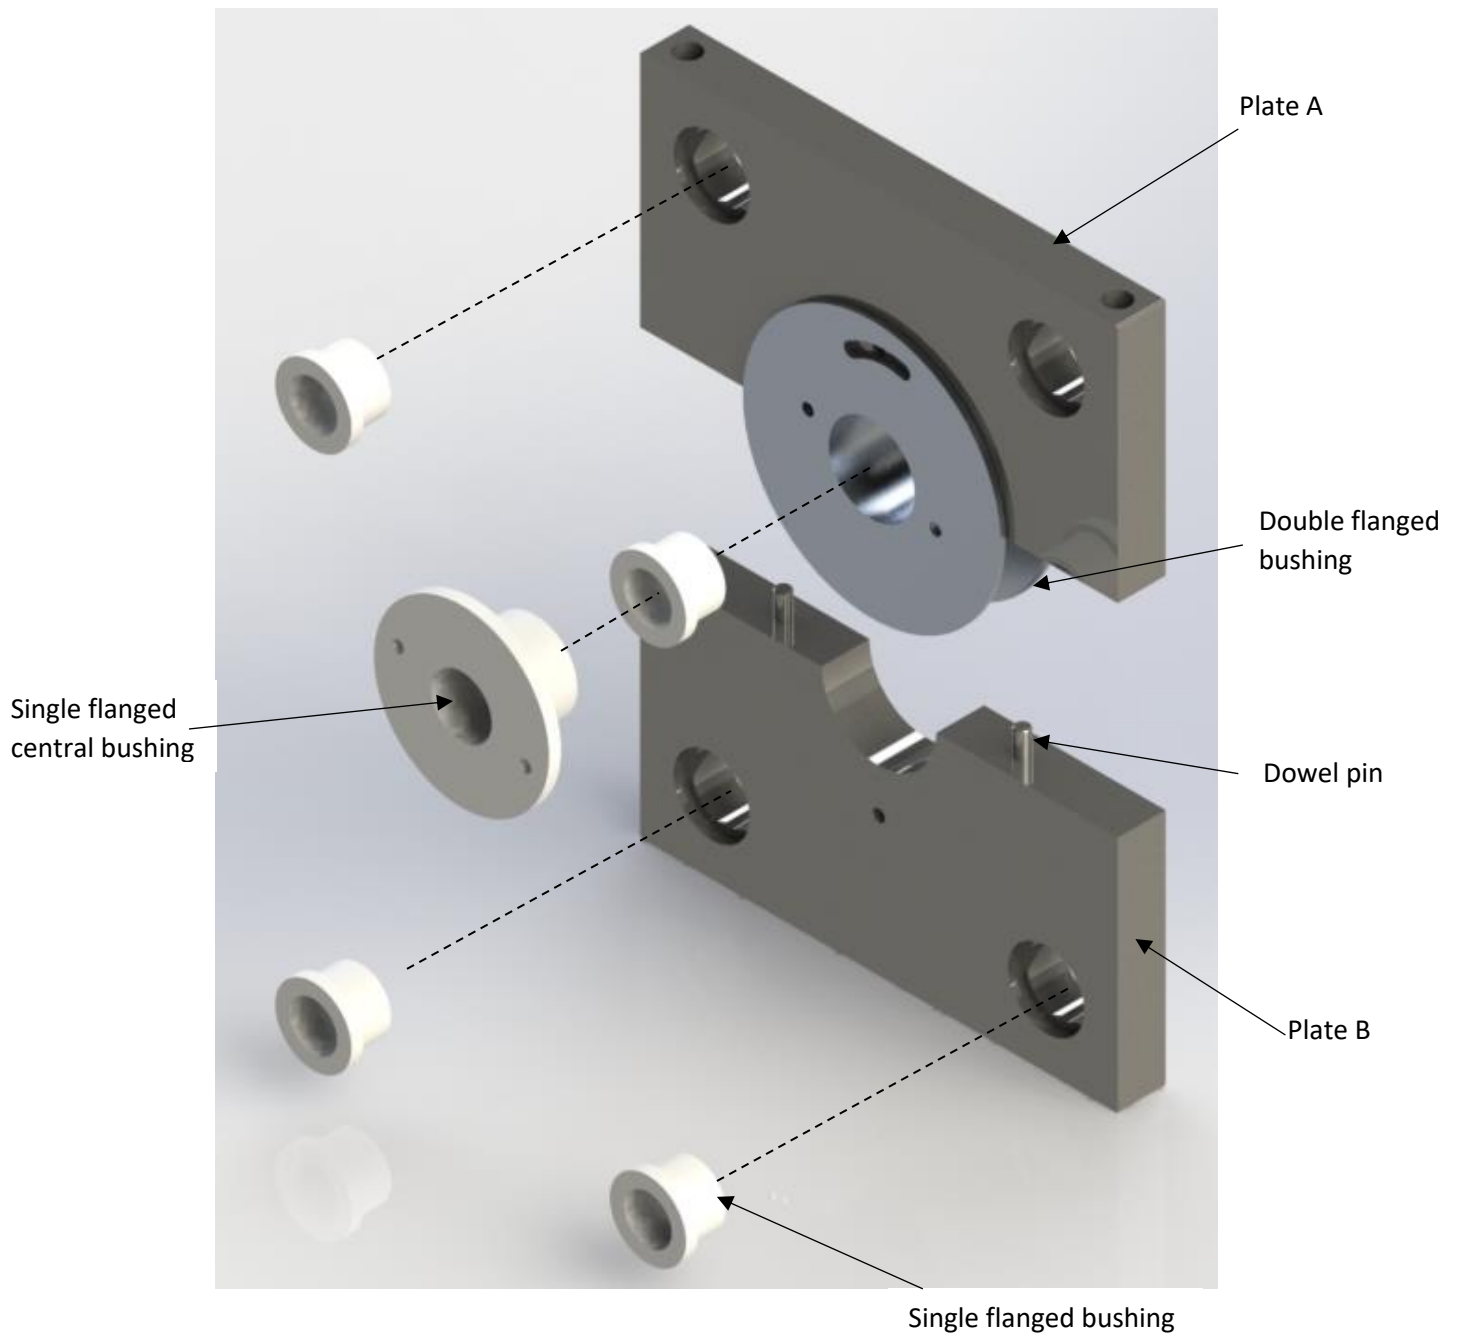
A rendered image showing the exploded view of the Front/Middle plate sub-assembly.
